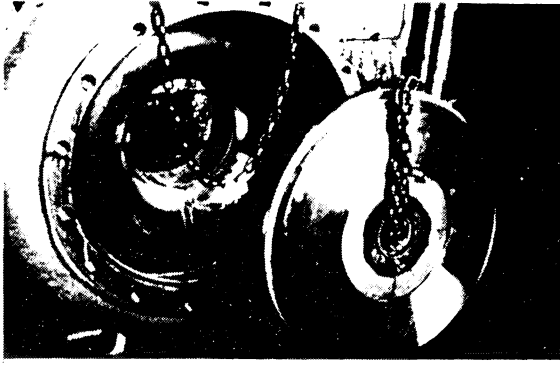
A — CASING AND END PLATE OF A TYPE 316 (ACI CF-8M) PUMP.
